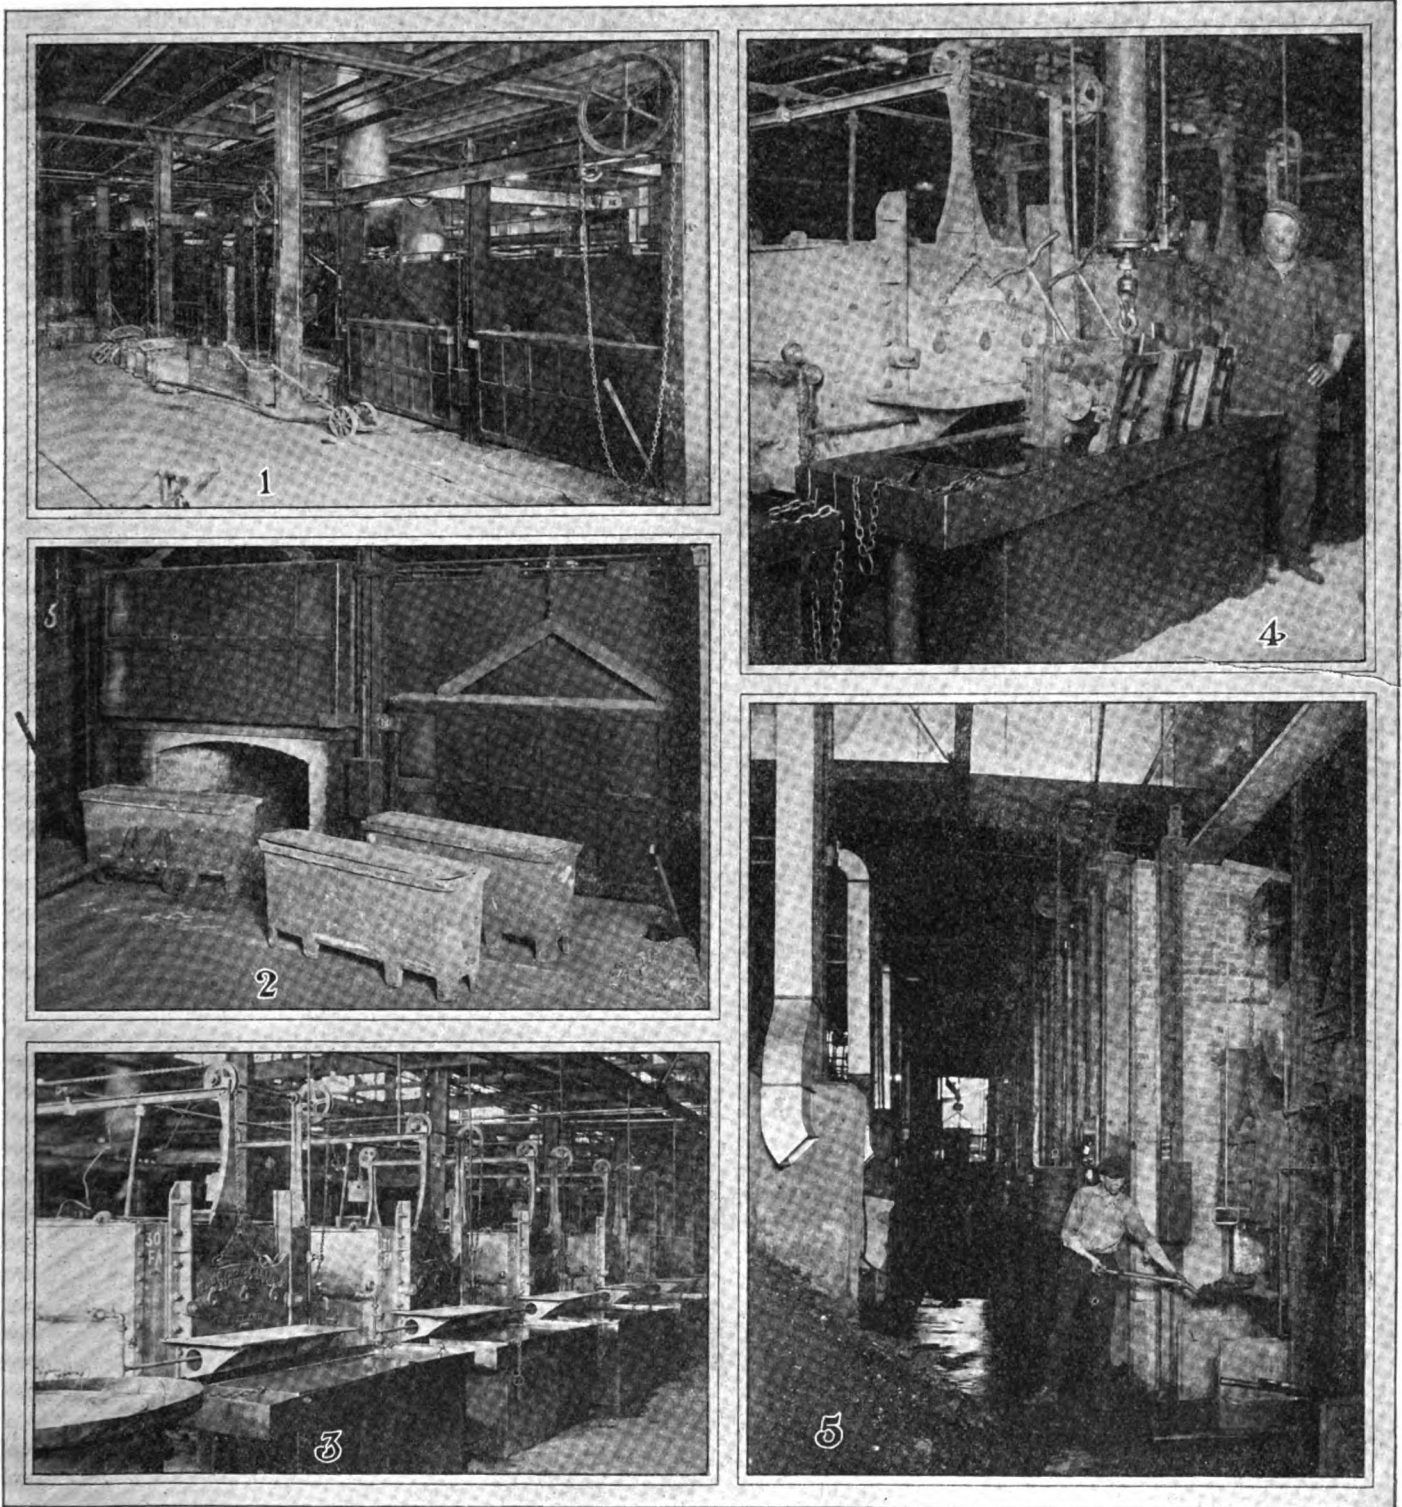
Ovens used in carburizing operation. Fig. 2—Carburizing boxes, in which shafts are placed before being put into ovens. Fig. 3—Furnaces and cooling tanks used in case-hardening. Fig. 4—Specially constructed die, in which shaft is placed when removed from furnace. When the shaft has been clamped in the die, the whole die is immersed in cooling tank. Fig. 5—Blower ventilating system is used throughout the heat-treating department. This illustration shows the installation in the firing pits
